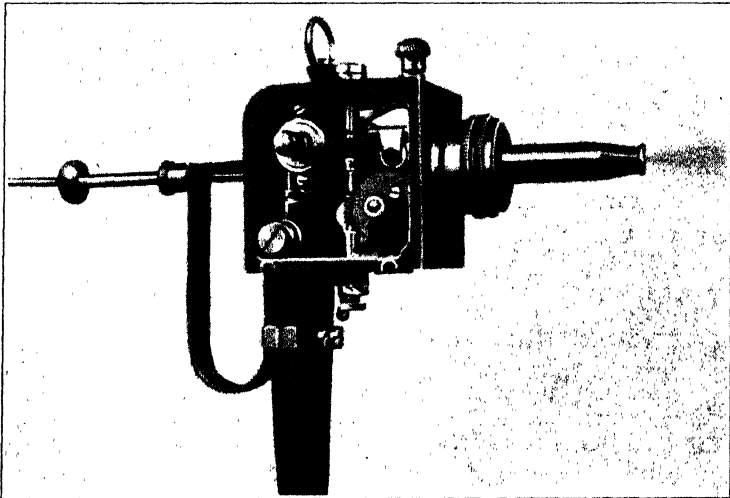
Model of the Wire-spraying Pistol formerly used by the German "Metallisator" Company.
